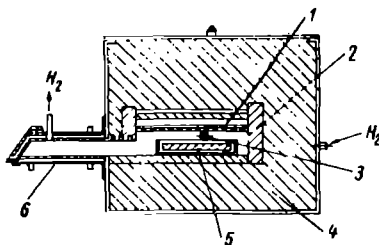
Muffle furnace with molybdenum heaters for sintering large molybdenum bars.
